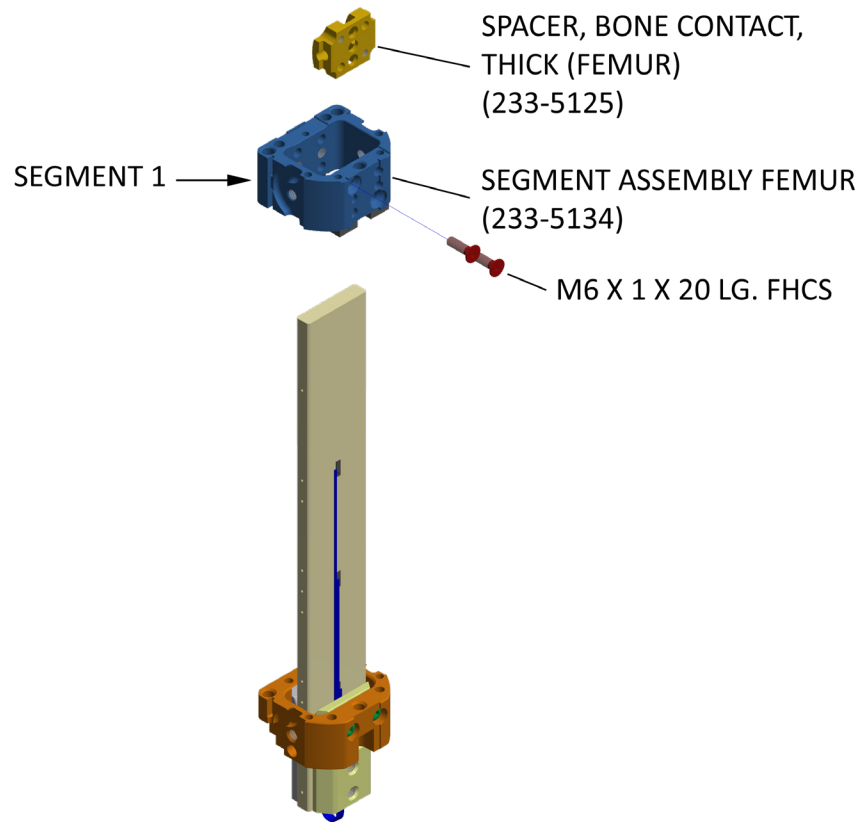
Attach Thick Bone Contact to Femur Segment 1
